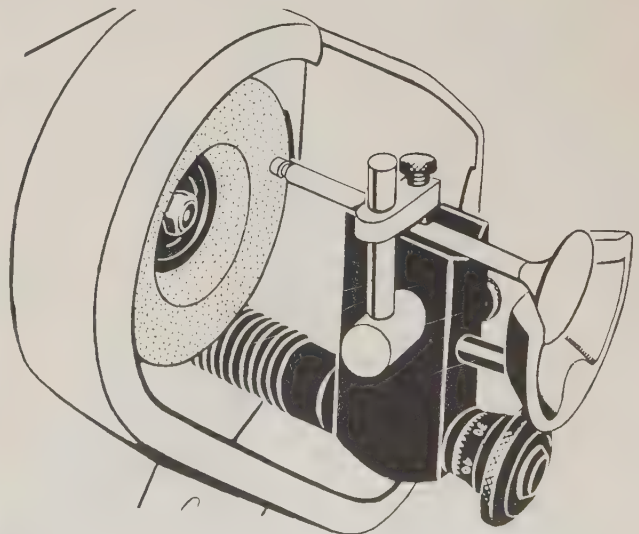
Grinding the tip-end of a valve stem. (Snap-on Tools Corporation)
